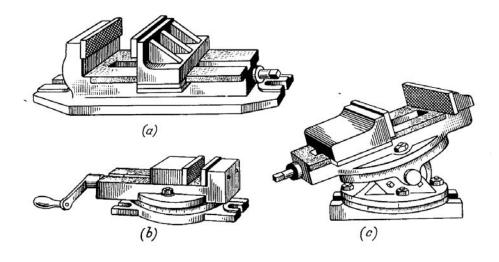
(b) Vices to hold jobs in drilling machines
